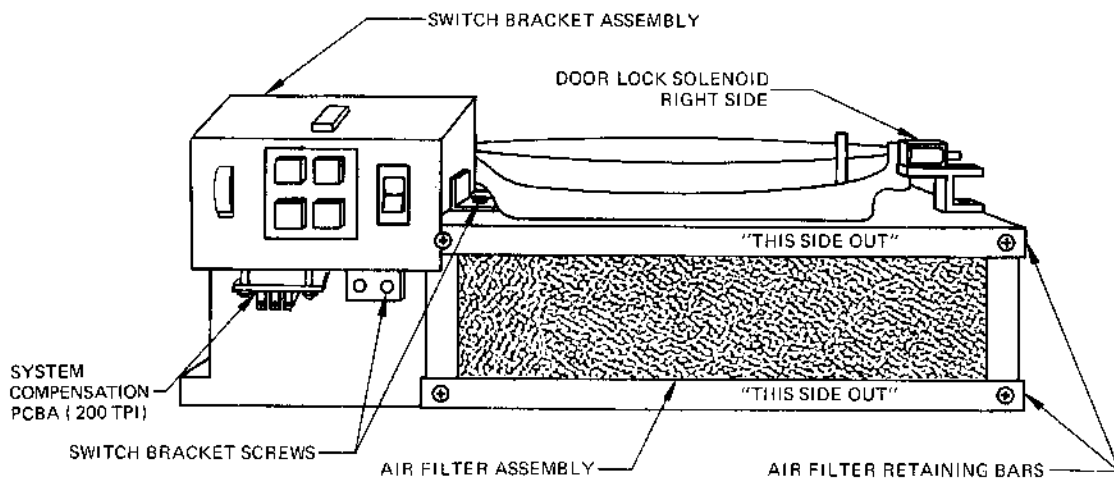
Switch Bracket, Solenoid Bracket and Air Filter Retaining Screw Locations
